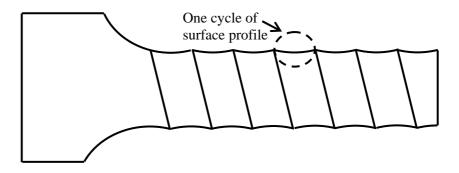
Two dimensional schematic shape of a periodic surface roughness of workpiece produced using a lathe machine.
